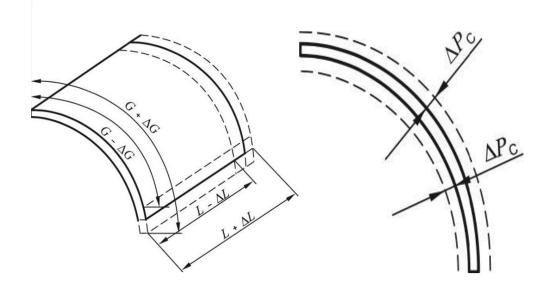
A TOLERANCES ON SHAPE ACCURACY, GIRTH AND LENGTH
